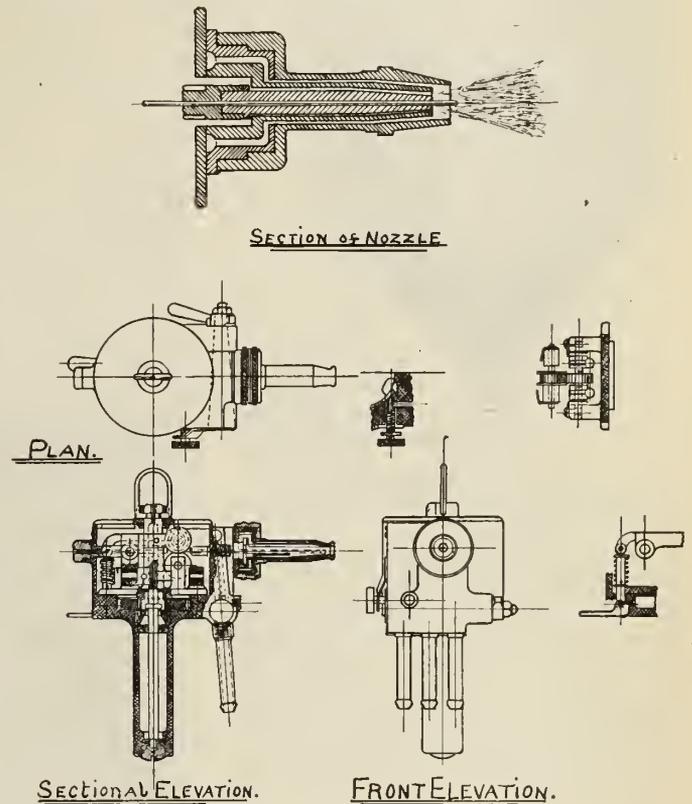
DETAILS OF PISTOL CONSTRUCTION.
